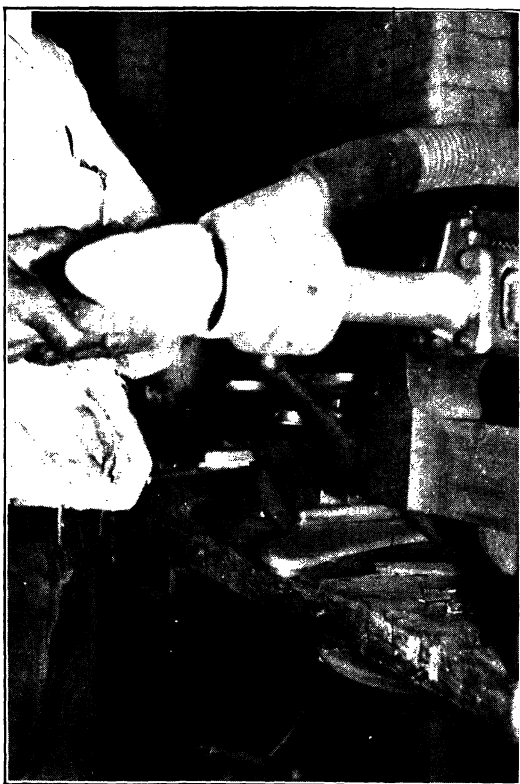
Local Exhaust Ventilation at a Small Grinder—Suction On (*Courtesy Connecticut Department of Health*)
